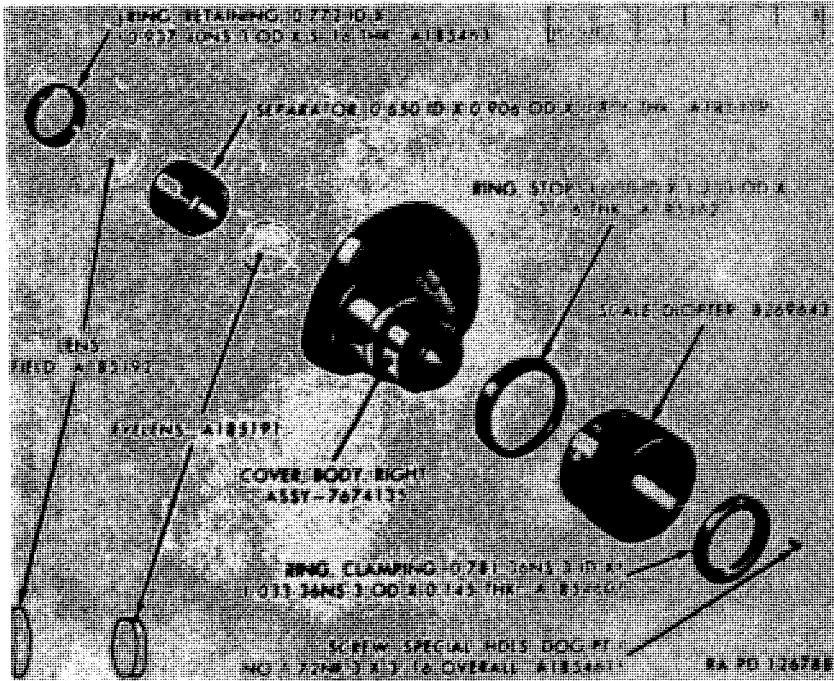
Right eyepiece assembly 7673632 — exploded view.
